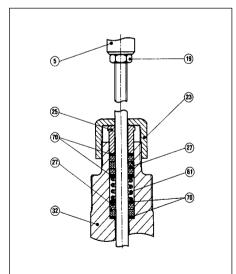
Stuffing box assembly wiht graphite rings (for series 25 valves only)
